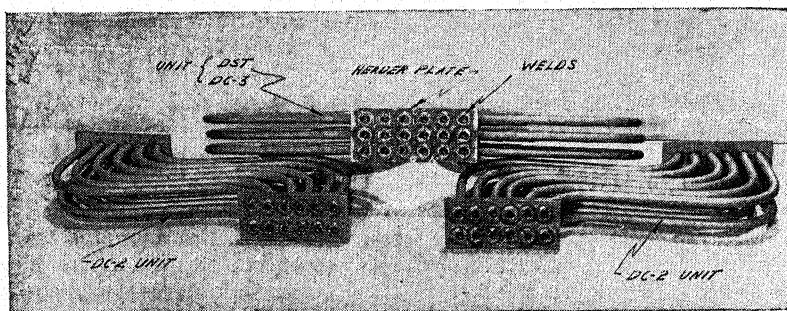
Arc welded boiler units, showing welds joining tubes to header.
